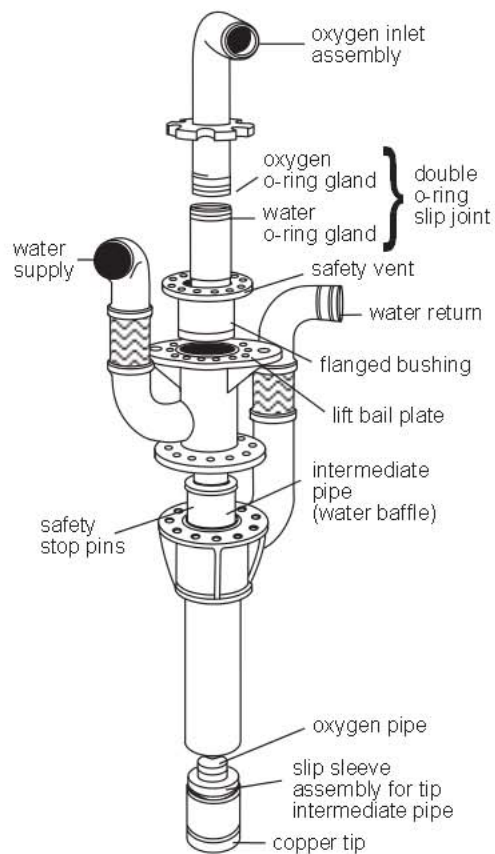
Top adapter assembly of the BOF oxygen lance.
